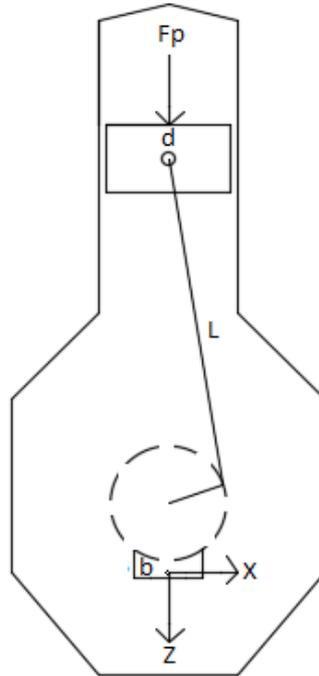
Main geometric parameters of the piston rod and crank mechanism.
